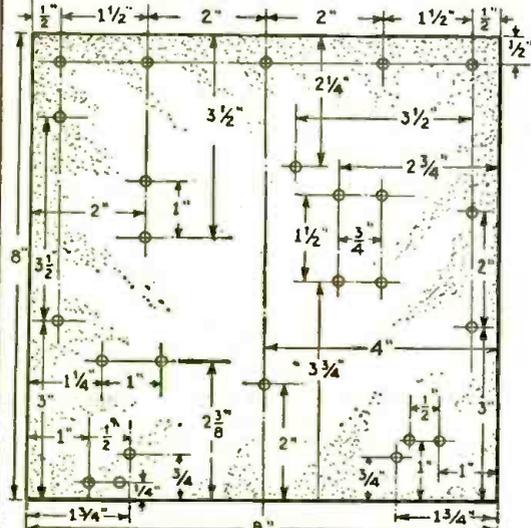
BASE BOARD LAYOUT (ALL HOLES 1/8" DIA.)
